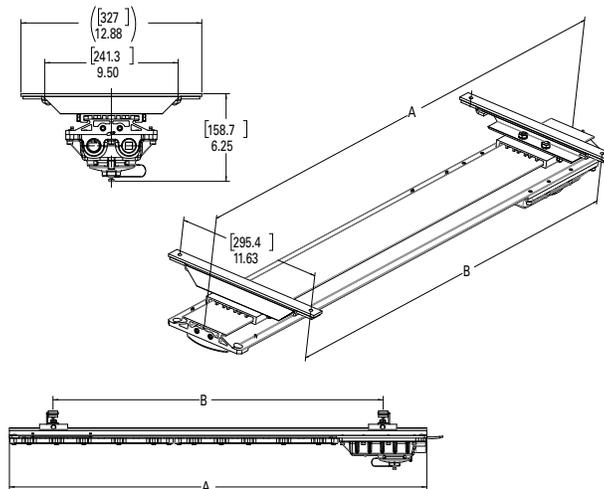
MP1054MTK MagnaPro or Surface Mount Installation
